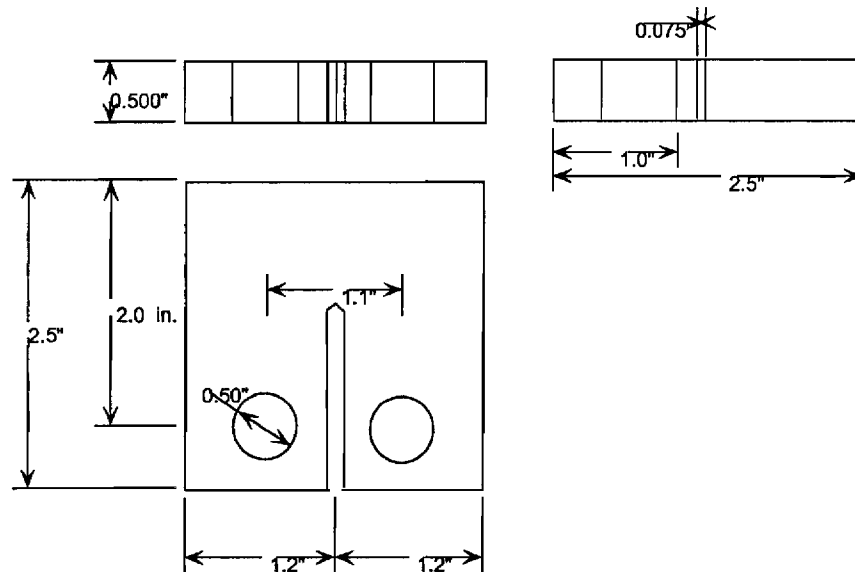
Compact tension (CT) specimen dimensions used for corrosion fatigue tests.
